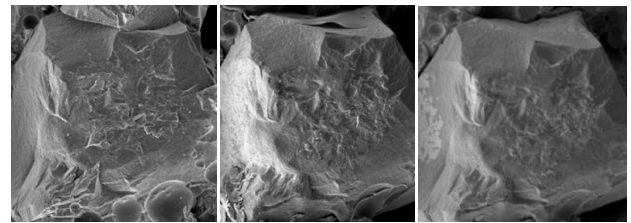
shows typical SEM images of grit cutting edges on the wheel working surfaces after dressing and grinding. Wear mechanism of the cBN-M wheel is mainly based on fracture-wear as well as attrition wear of grits, as grasped in fig.5 (a). It is difficult to grind a stock removal of 500 mm³/mm and more using the cBN-M wheel at work speed 0.35 m/s, because of its heavy wheel wear. In contrast, wear mechanism of the cBN-U wheel is dominantly based on the mixed behaviour of micrometer-sized fracture-wear and minor attrition wear of cutting edges, as shown in Fig. 5 (b). The difference in grinding ratio between cBN-U and cBN-M wheels is mainly caused by the difference in such wear mechanism of grit cutting edges between both wheels [2].
